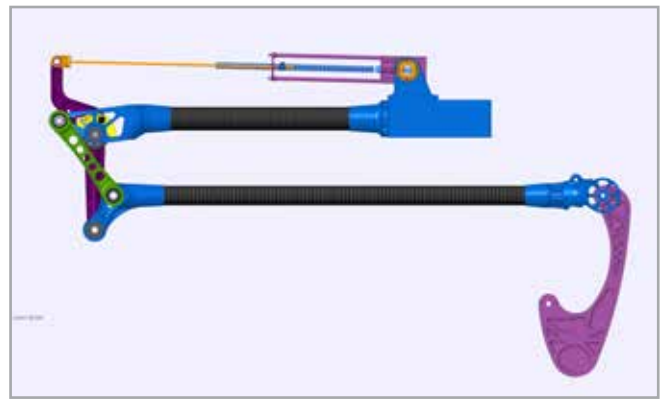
CAD design of Skippy. Real Skippy is currently being manufactured. Springs, ring screw nut and electric motor are not displayed.
